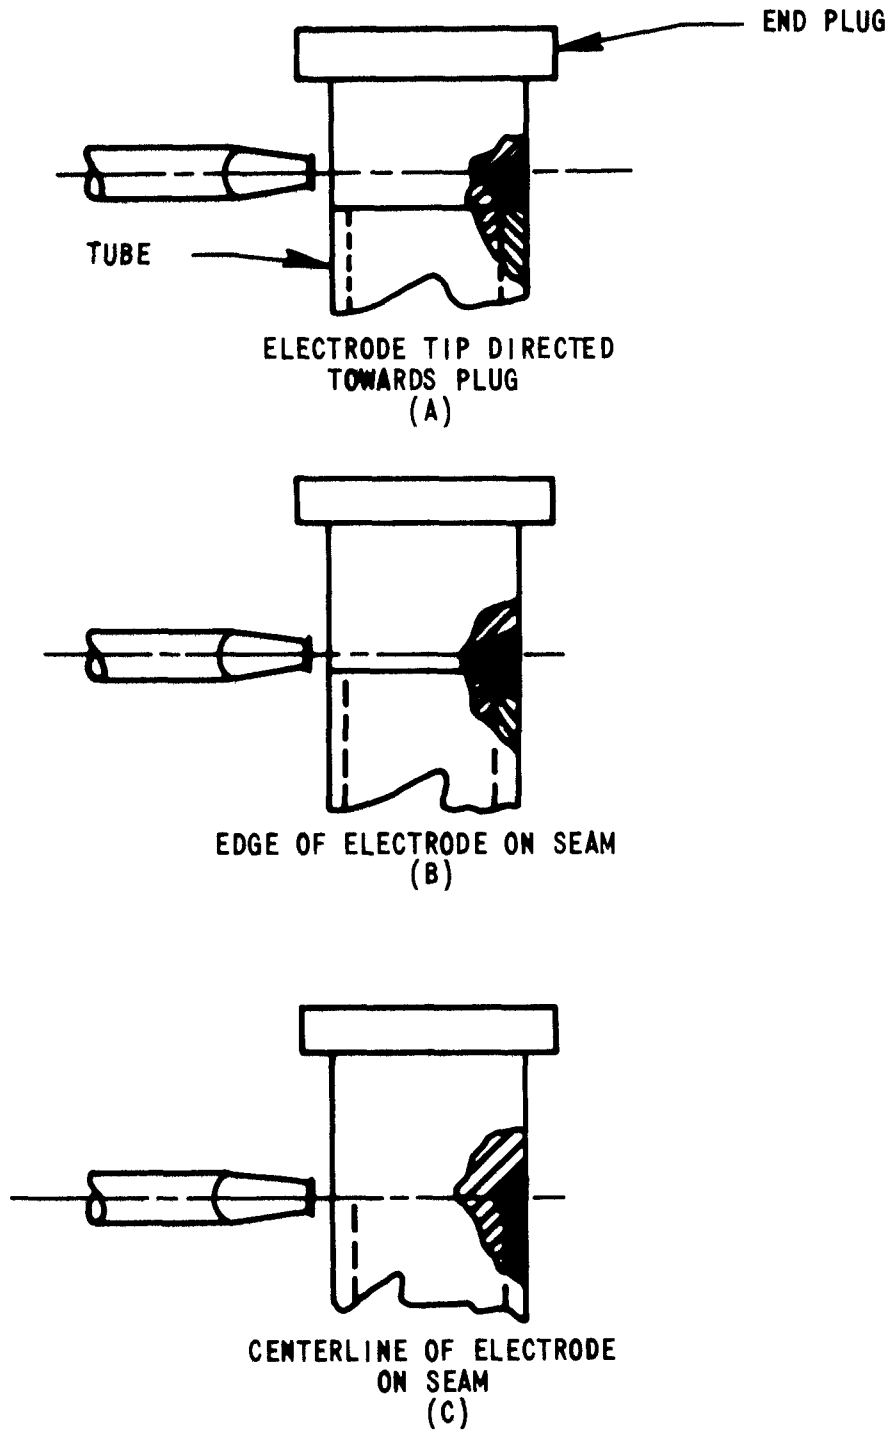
Effects of Electrode Position on Resulting Weld Nugget Geometry
